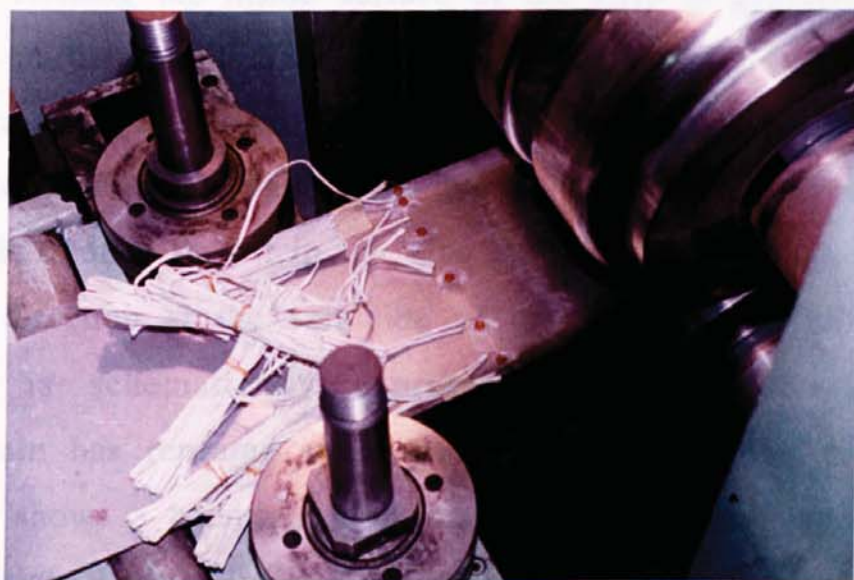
Appearance of strain gauges pasted on strip surface at the entry side of the edge bend rolls
